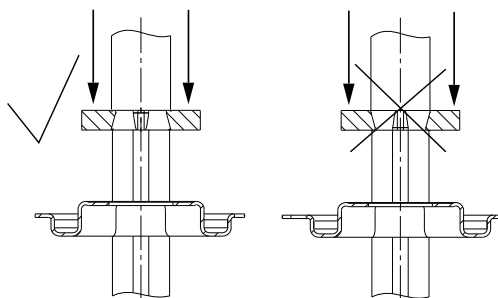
Fitting the stationary shaft seal part (only SiC/SiC)
